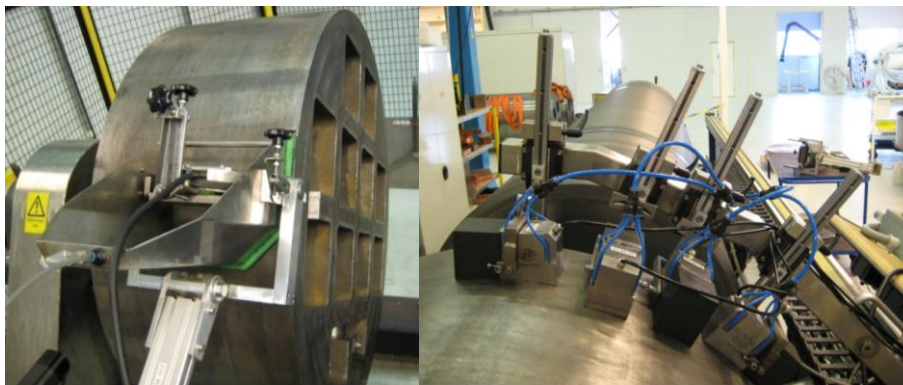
Fixture for the local immersion technique (left) and with the four 70° linear arrays (right).
